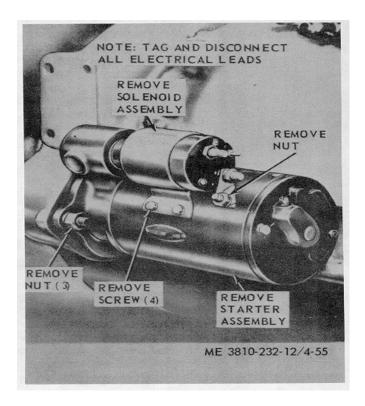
Carrier engine s tarter and solenoid relay, removal and installation.
